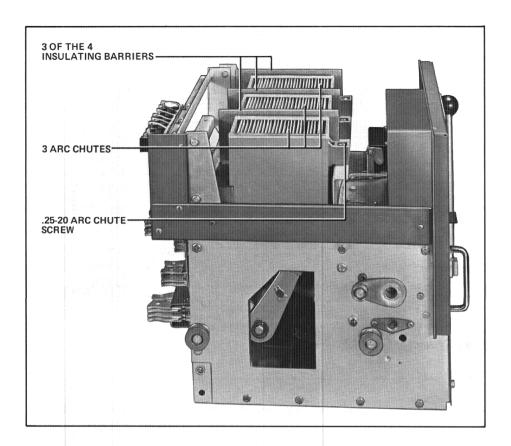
Breaker with Barrier Removed to Show Mounting of Arc Chutes
